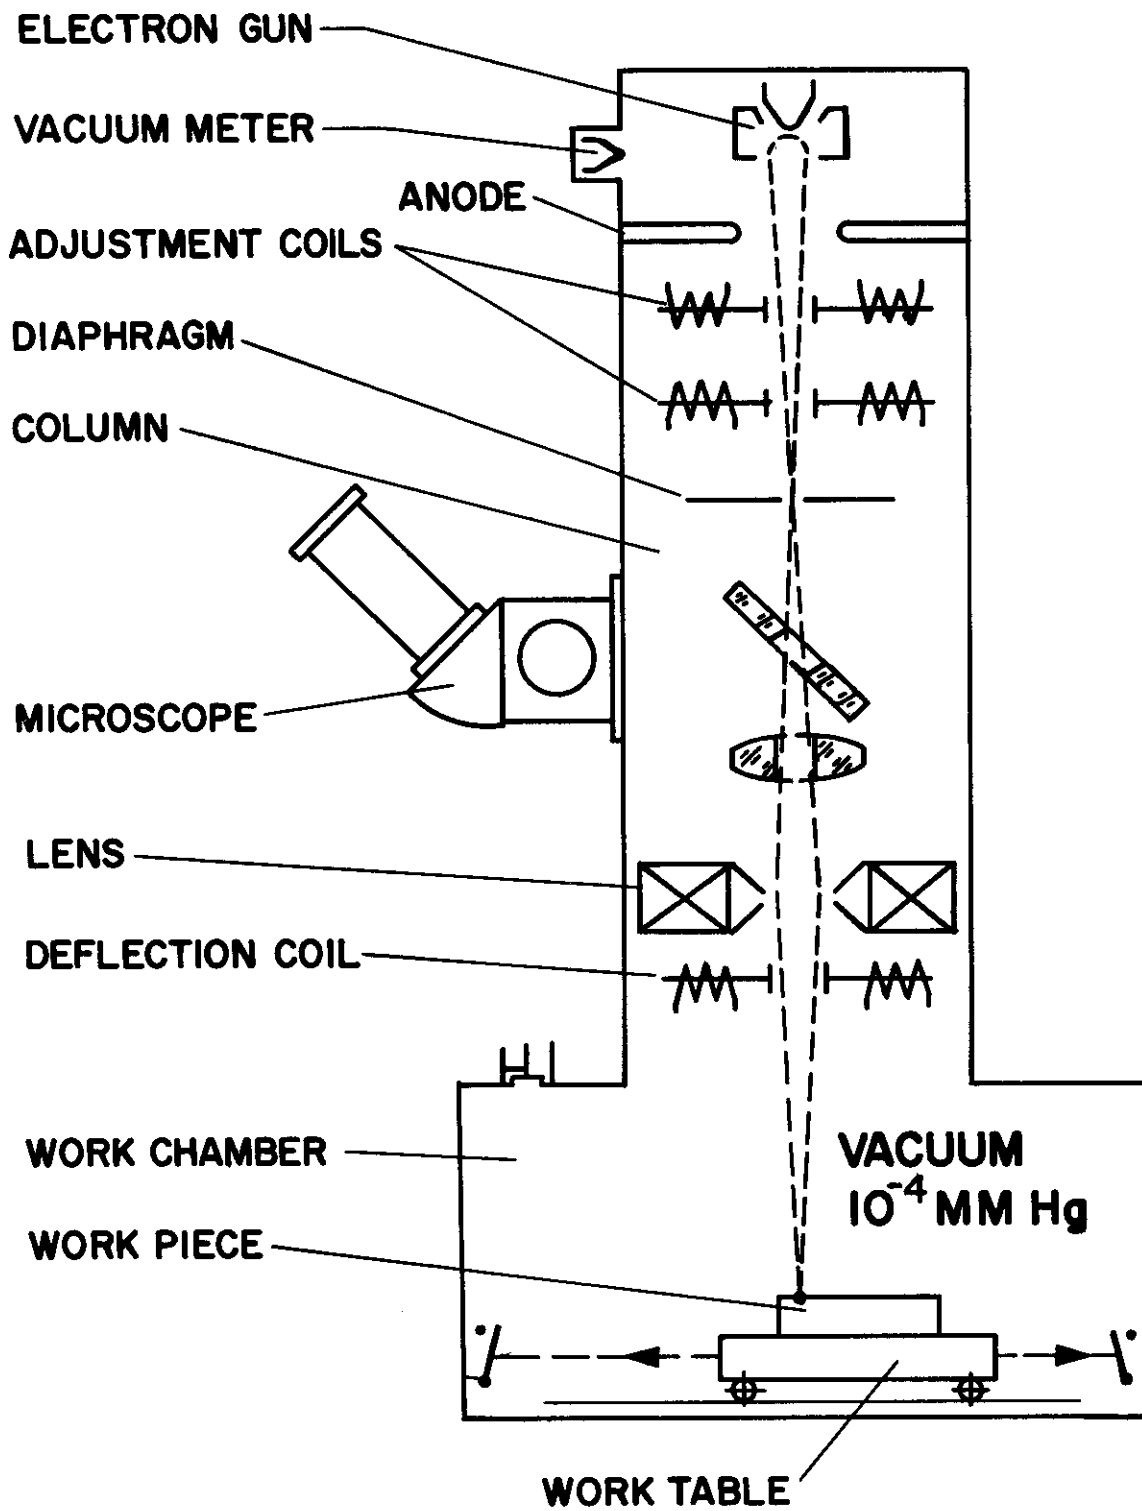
Electron Beam Welding Machine Schematic
